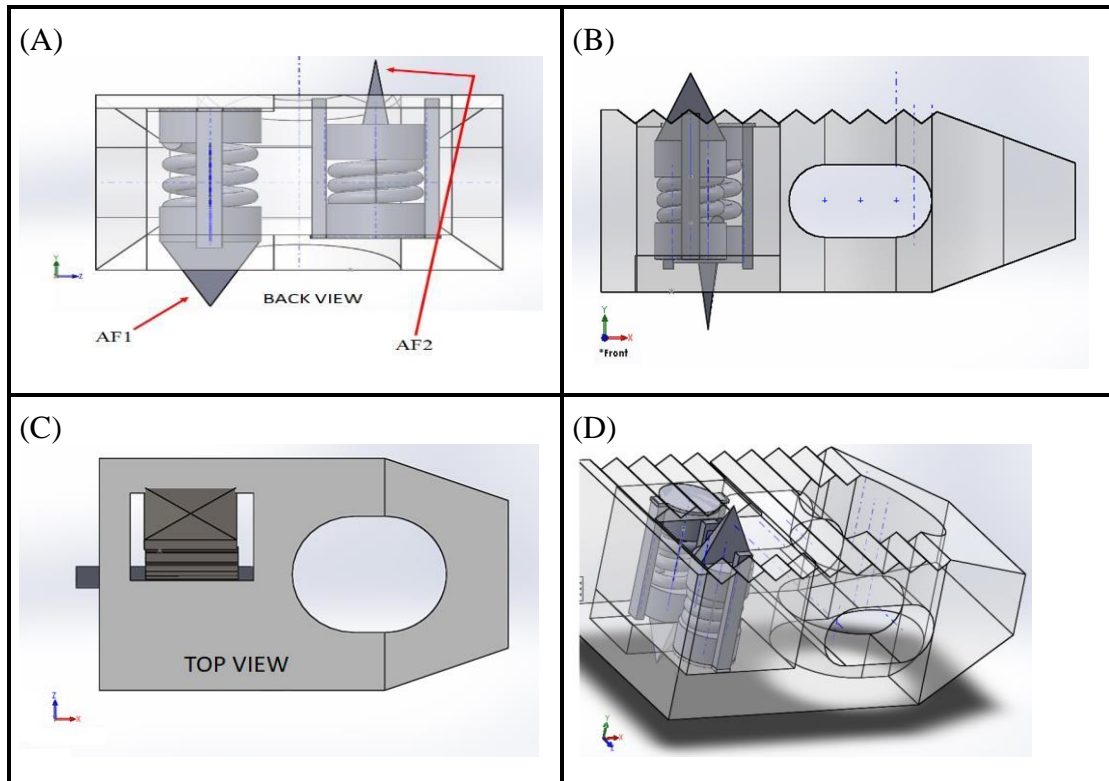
Three-dimensional model of cage implant for SLM-M2: (A)Back view, (B)Side view, (C)Top view, (D)Isometric view.
